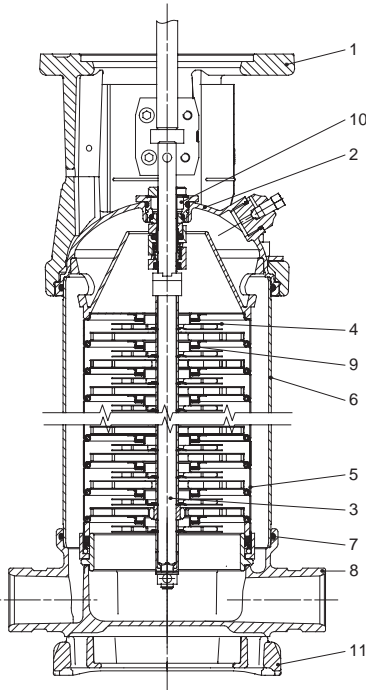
Sectional drawing of CRNE 1 and 3-HS
